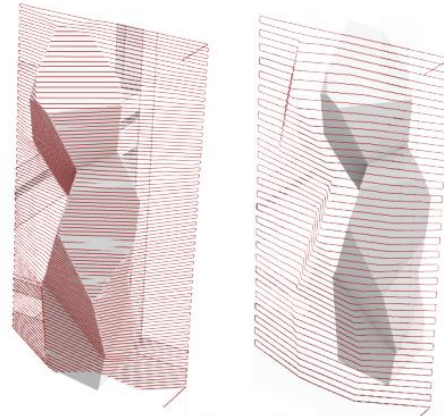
Precise tool path(left) near the component, and loose tool path(right) to remove excessive foam
